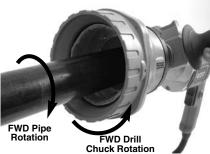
Proper Use of Prep Tool to Remove Pipe OD Burr With Rotating Pipe
